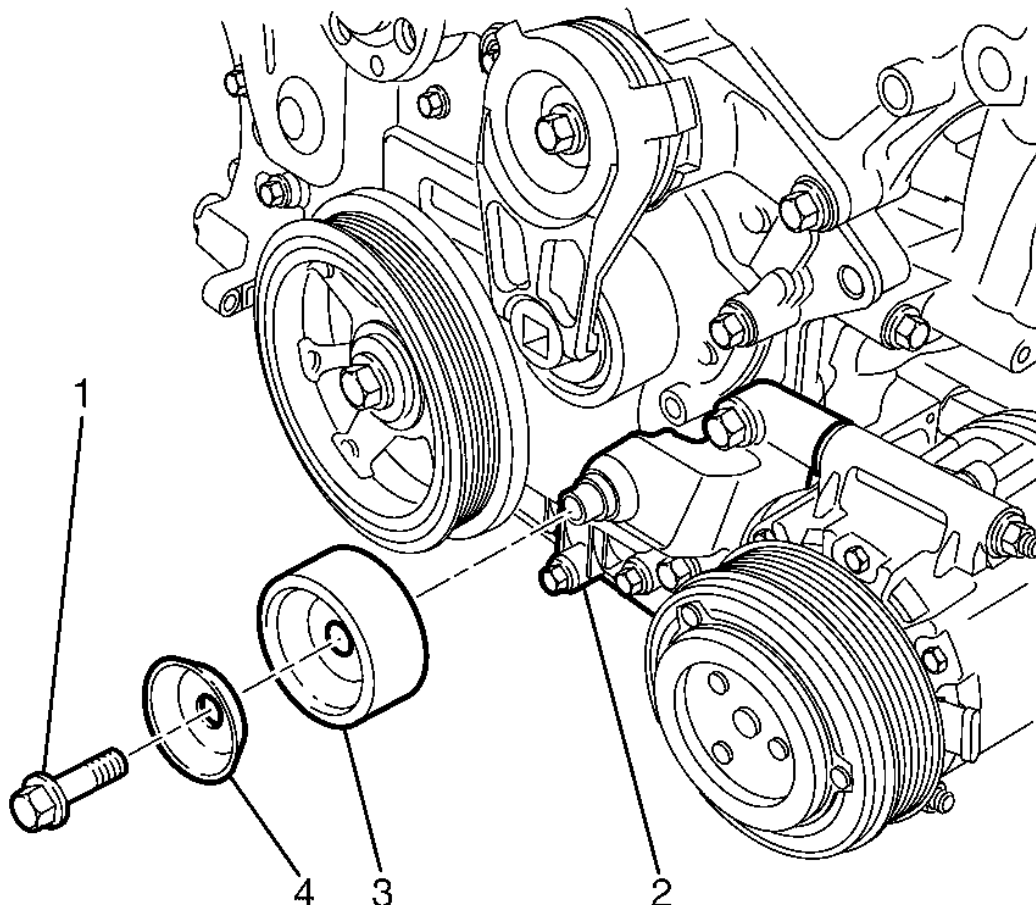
View Of Dished Washer, Drive Belt Idler Pulley, Accessory Drive Mounting Bracket & Retaining Bolt
